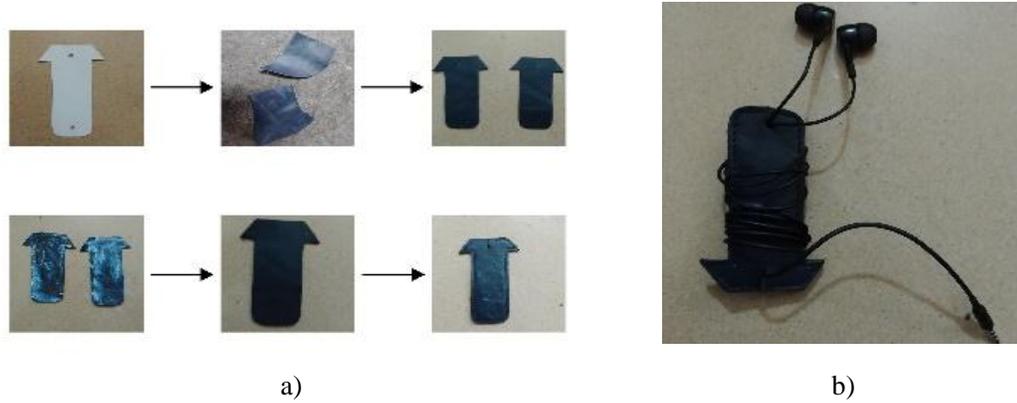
Headphone holder (a) manufacturing process (b) final view.
